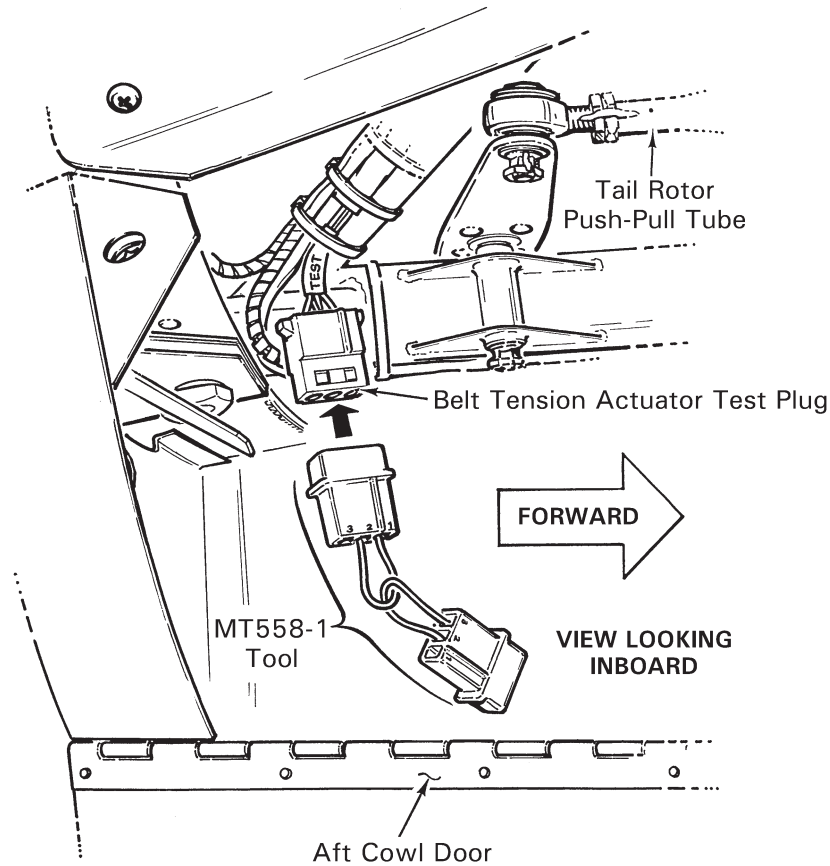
MT558-1 TOOL INSTALLATION
